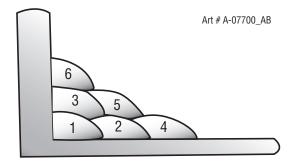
Multi-runs in HV Fillet Weld
